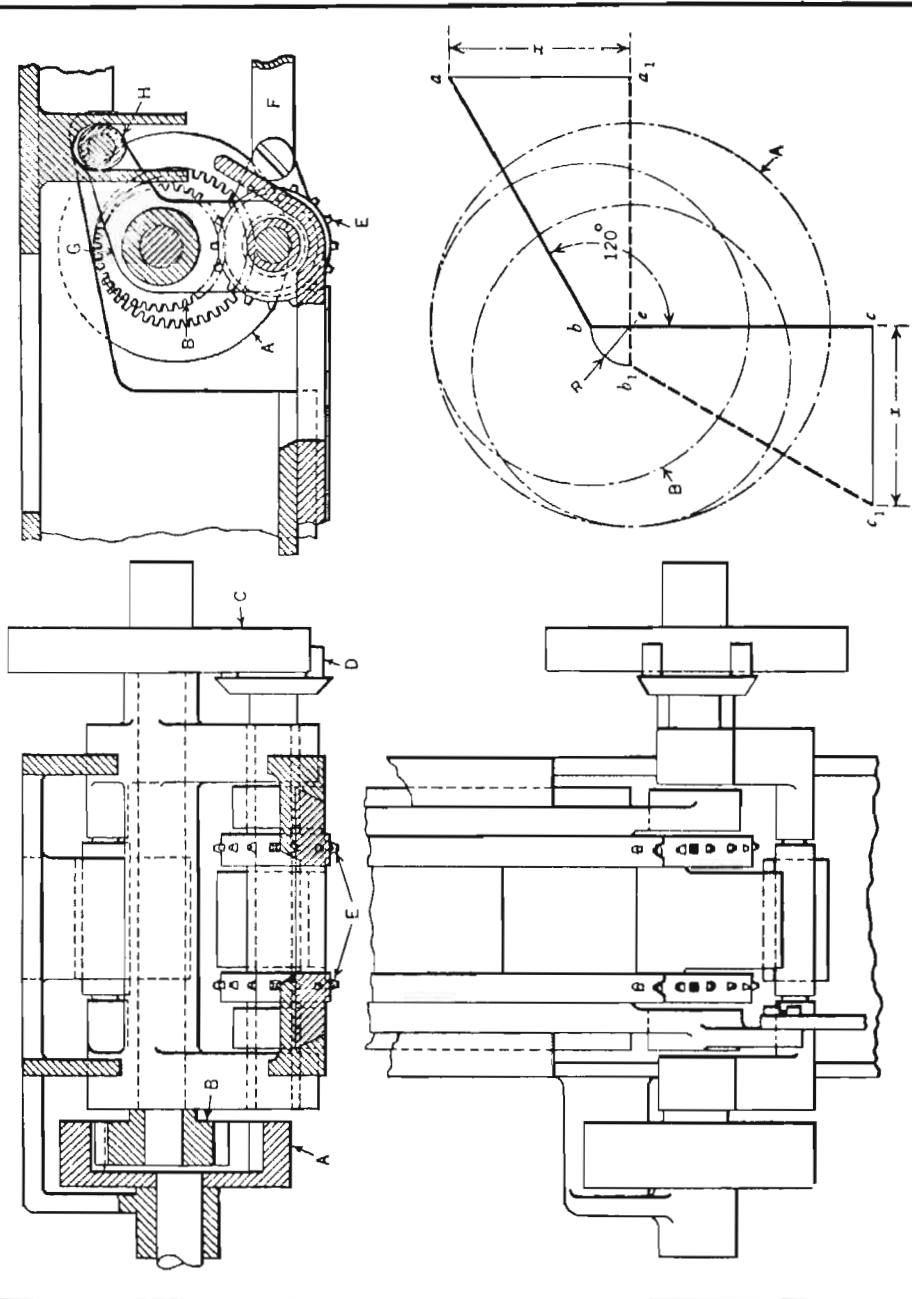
Mechanism of a Moving Picture Projector which Makes it Possible to Adjust Film Sprocket Along a Straight Line without Interfering with its Intermittent Drive
